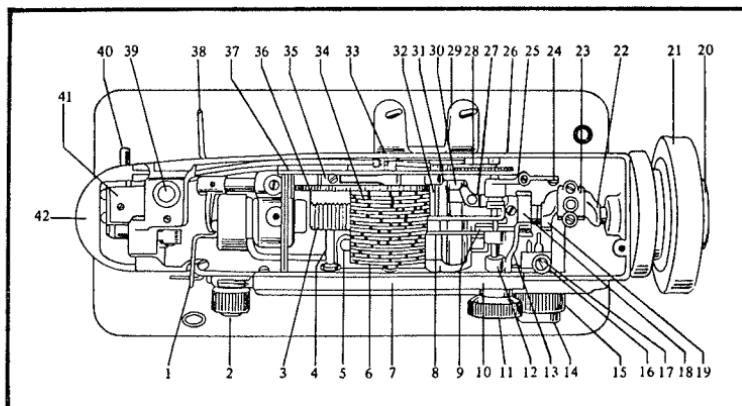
View of the upper mechanism, including the cam stack, of White Model 960. 1. Take Up Lever; 2. Thread Dial Tension; 3. Zigzag Worm Wheel; 4. Zigzag Width Gear Shaft; 5. Nut for Zigzag Pattern Cam Amounting Base; 6. Zigzag Pattern Cam; 7. Pattern Indicating Emblem; 8. Zigzag Driving Arm; 9. Contacting Finger Lifting Cam; 10. Pattern Selecting Dial Shaft; 11. Pattern Selecting Dial; 12. Index Driving Gear; 13. Click Stop Spring for Pattern Selecting Dial; 14. Reverse Push Button; 15. Stitch Length Regulating Dial; 16. Set Collar for Feed Regulating Panel; 17. Set screw for Feed Regulating Panel; 18. Feed Cam; 19. Feed Regulating Body; 20. Stop Motion; 21. Balance Wheel; 22. Arm Top Shaft; 23. Crank Rod; 24. Automatic Feed Rod; 25. Contacting Finger for Reverse Feed; 26. Contacting Finger Moving Gear; 27. Driving Arm for Reverse Feed Cam; 28. Contacting Finger Moving Medialy Gear; 29. Contacting Finger Moving Gear; 30. Contacting Finger Body; 31. Releasing Arm for Contacting Finger Arm; 32. Zigzag Driving Arm Shaft; 33. Zigzag Pattern Cam Shaft; 34. Cam Gear; 35. Zigzag Gear Supporting Arm; 36. Automatic Zigzag Width Gear; 37. Zigzag Pattern Cam Amounting Base; 38. Presser Bar Lifter; 39. Darner; 40. Switch Button; 41; Light Assembly; and 42. Face Plate.
